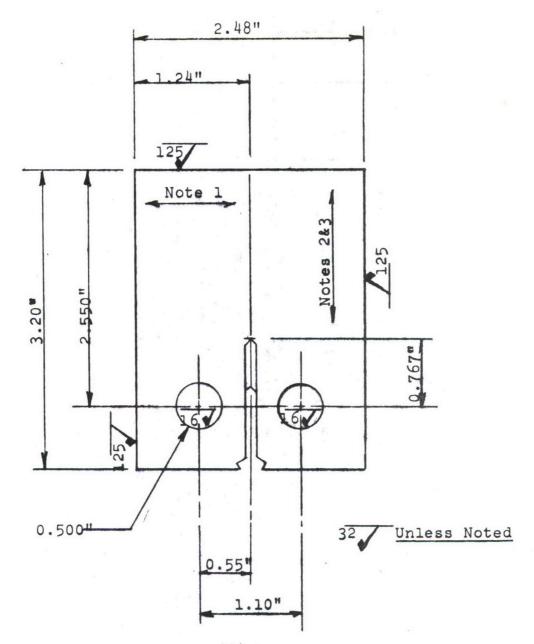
EDM Notched Crack Propagation Specimen
